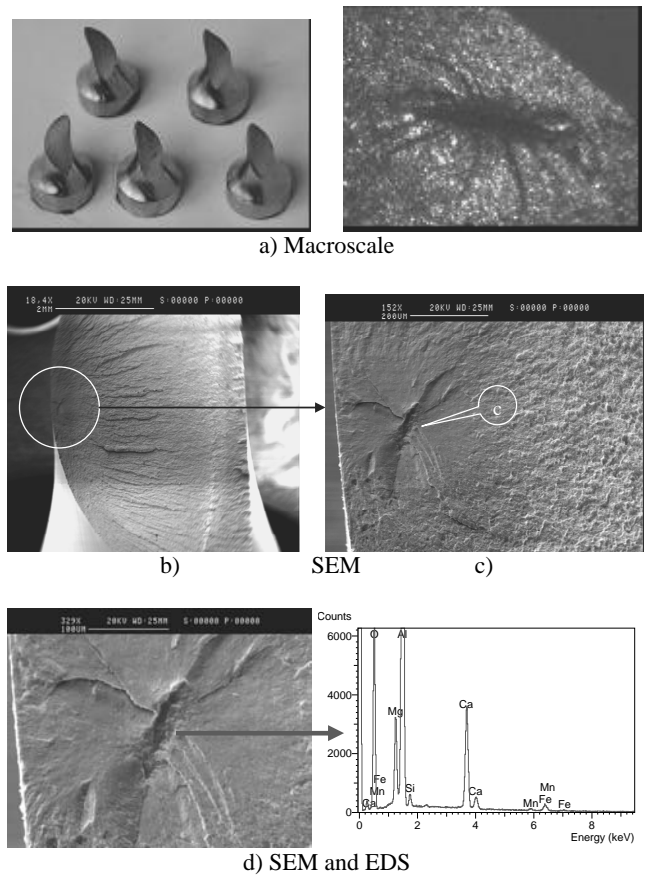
I. Fatigue fracture surfaces of AISI52100 produced by ultrasonic cyclic torsion; a) fractured specimens and appearance of “scorpion or spider-shaped form”; b) fracture surfaces showing fatigue crack initiation from the inside inclusion; c-d) detail of “scorpion or spider form” and inclusion; ($\tau_{max}=370\text{MPa}$; $N_f=3.06 \times 10^7$ cycles)
